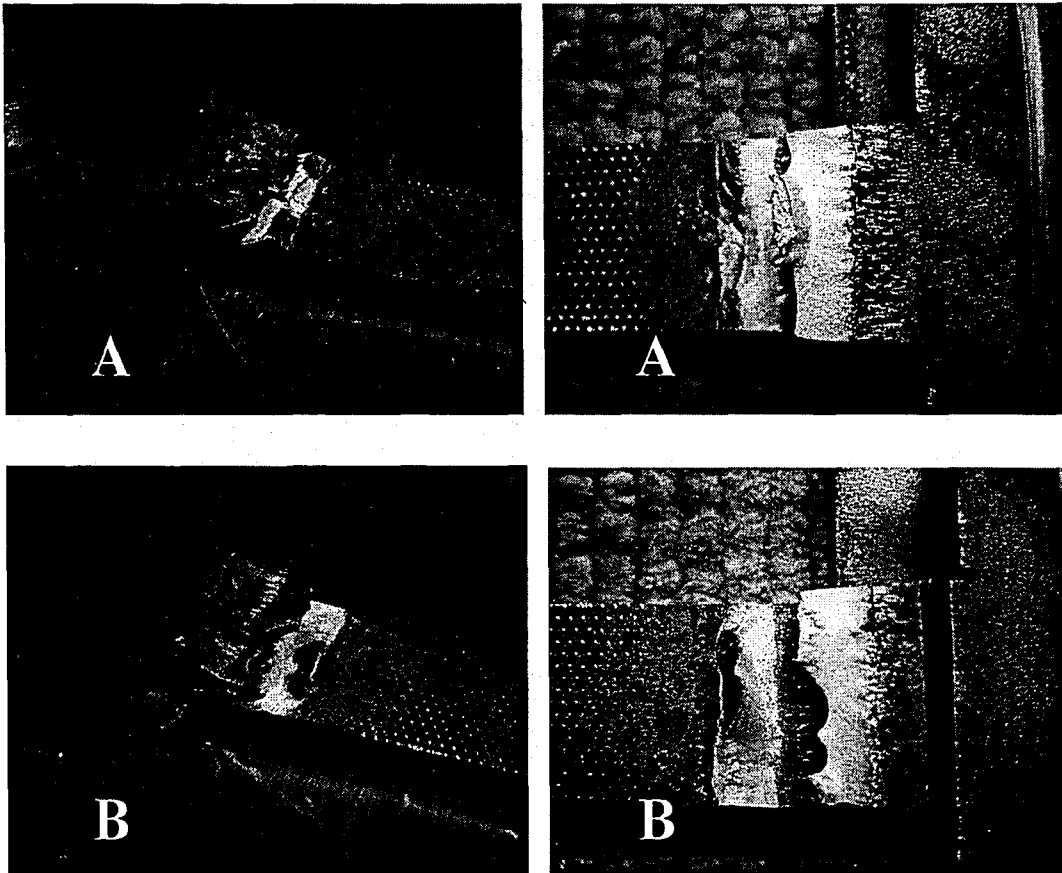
Specimen T-3 Fracture Surfaces
